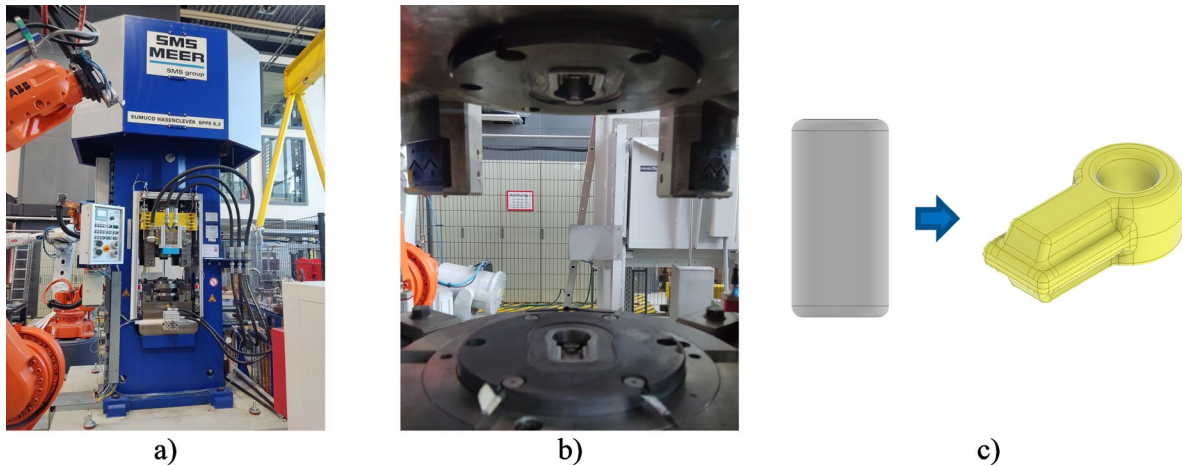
SMS SPPE 6.3 screw press (a), forging setup (b), workpiece and forging (c) geometries
